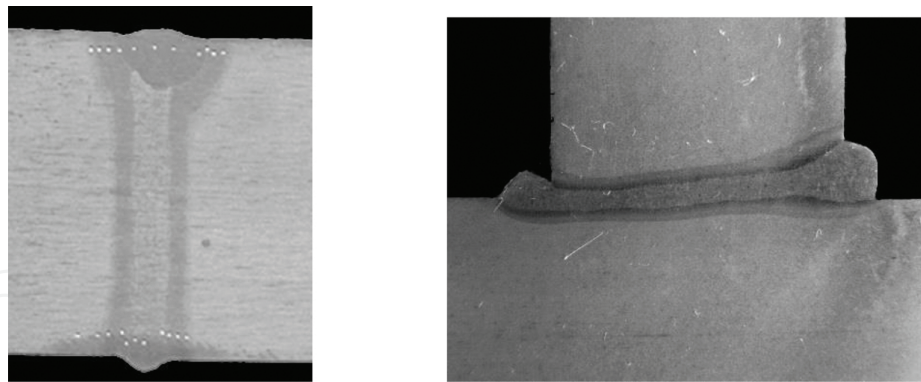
Butt HLAW joint in shipbuilding section (Material – steel PCE36, 20 mm thickness) – left, angle joint in shipbuilding section (Material – steel 09Г2С 15 mm thickness) – right.
